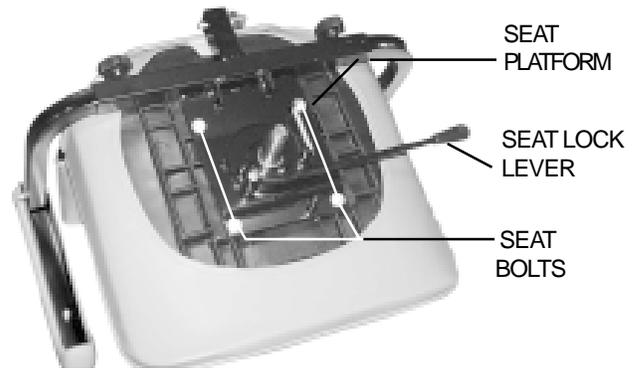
FRONT-TO-BACK SEAT ADJUSTMENT
